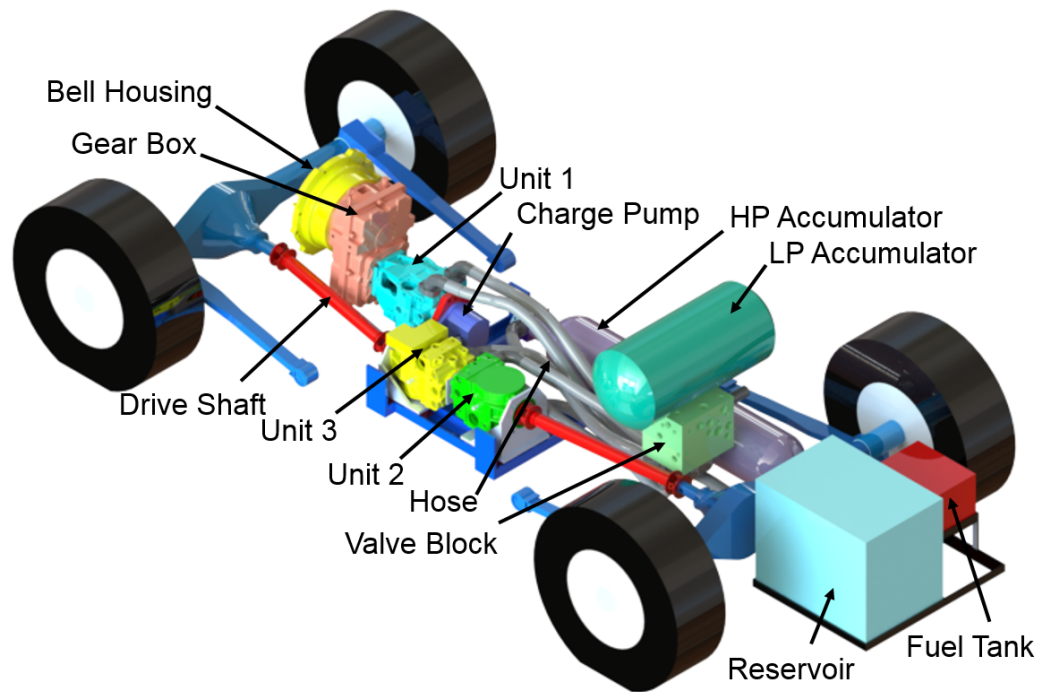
Final packaging design of the blended hydraulic hybrid.
